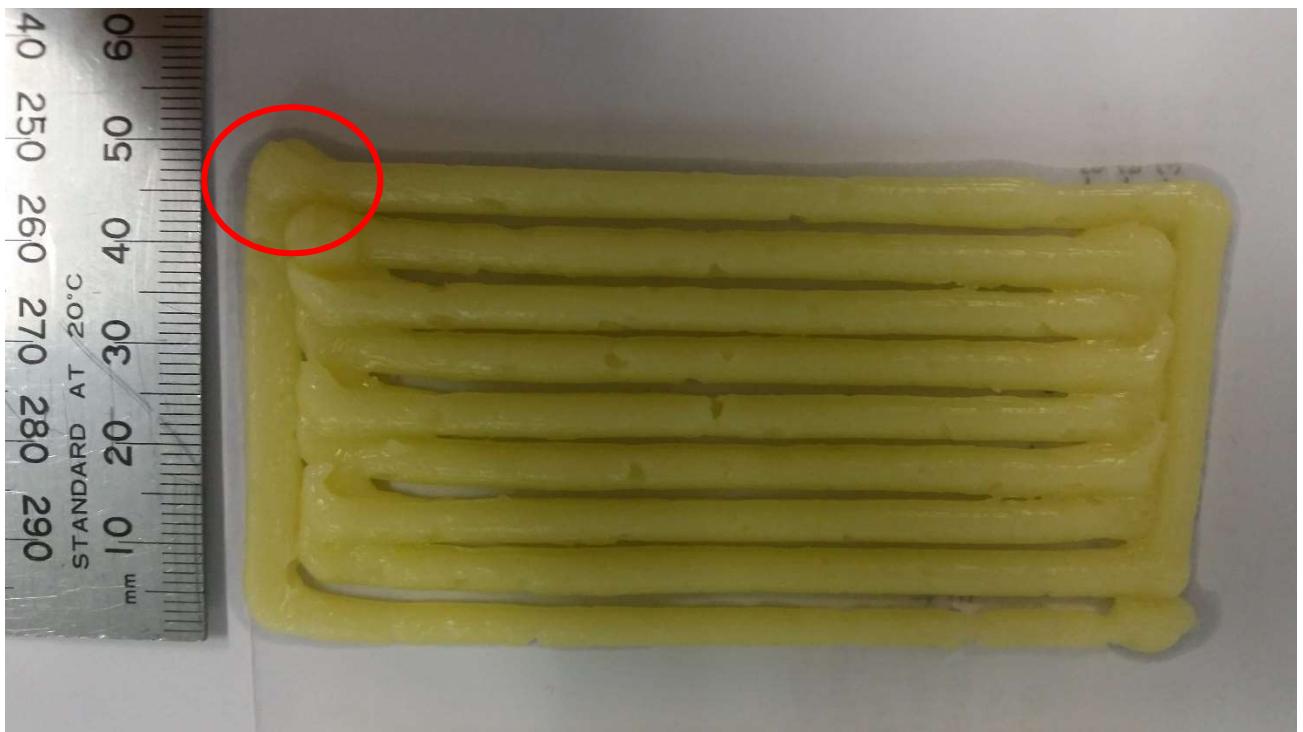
Rectangle Horizontal Deposition Layer Width measurement
